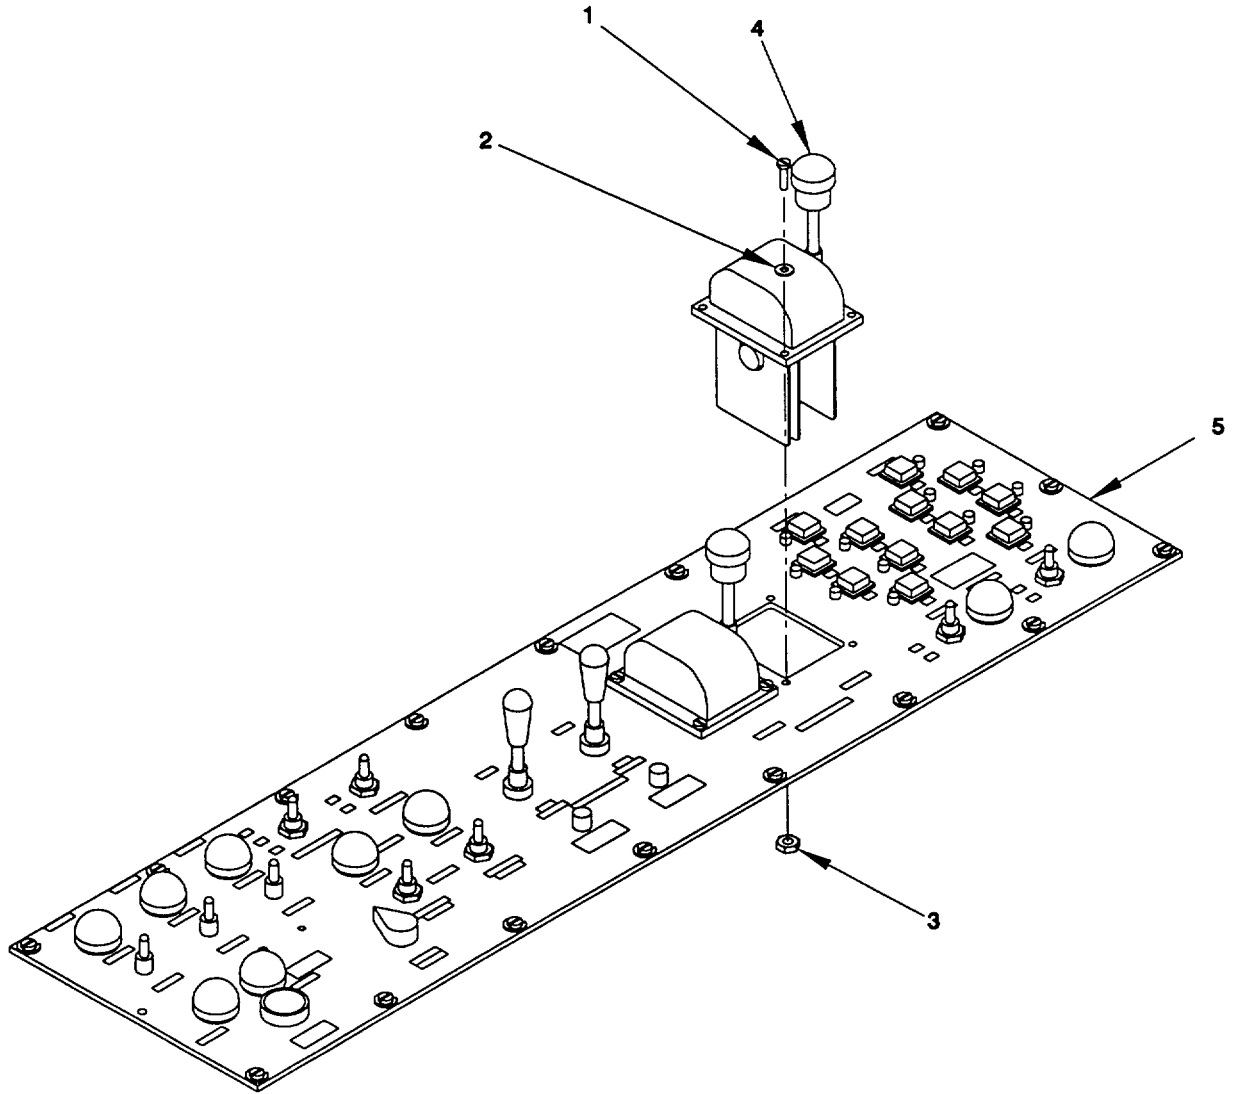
Throttle Control, Lower Control Panel "A2", Remove/Install.
